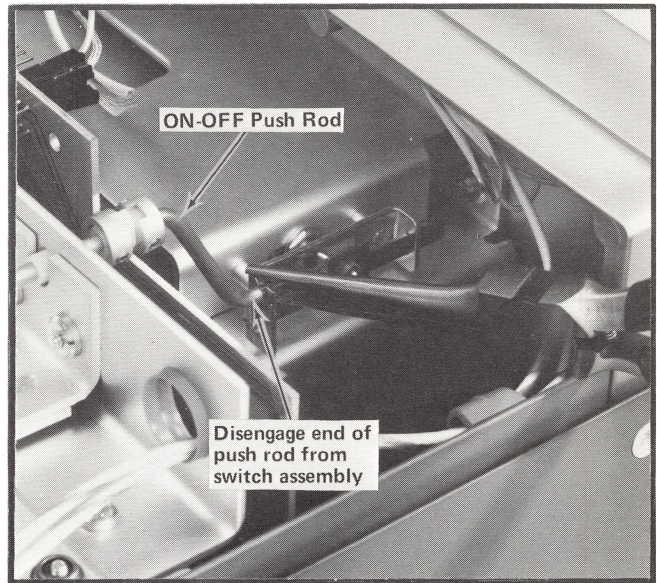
Disconnecting ON-OFF push rod from switch assembly.
